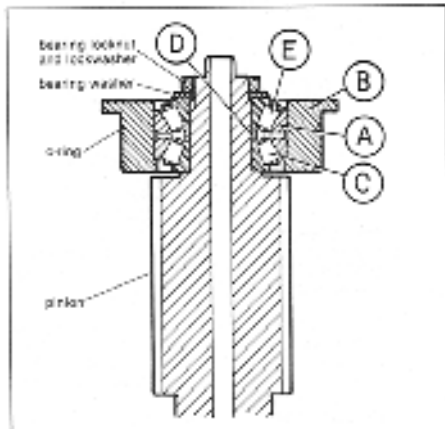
Cross Section Showing Sequence of Assembly for Pinion Bearings.
